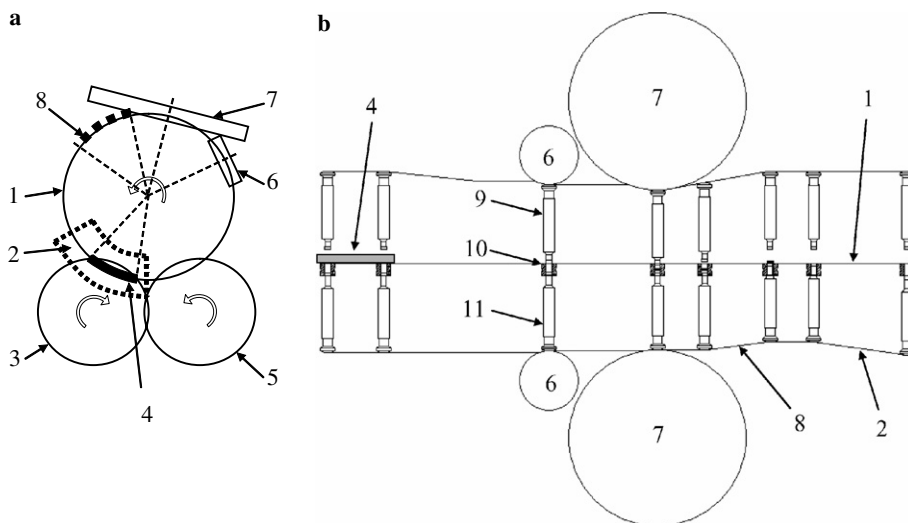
Rotary press production cycle. (a) Top view, (b) unfolded view. 1, Die table; 2, fill cam; 3, feed wheel; 4, die fill area; 5, metering wheel; 6, pre-compression roller; 7, main compression roller; 8, ejection cam; 9, upper punch; 10, die; 11, lower punch (after Sinka and Cocks [2]).
